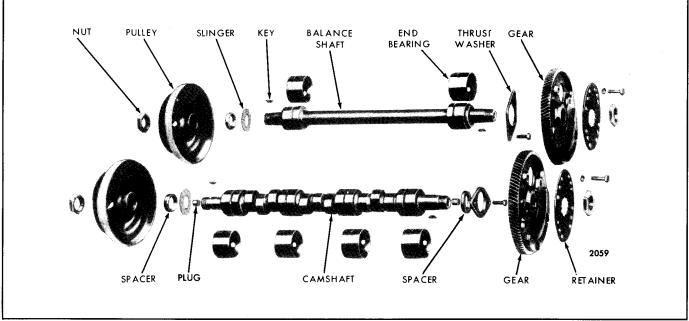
Camshaft and Balance Shaft Details and Relative Location of Parts
